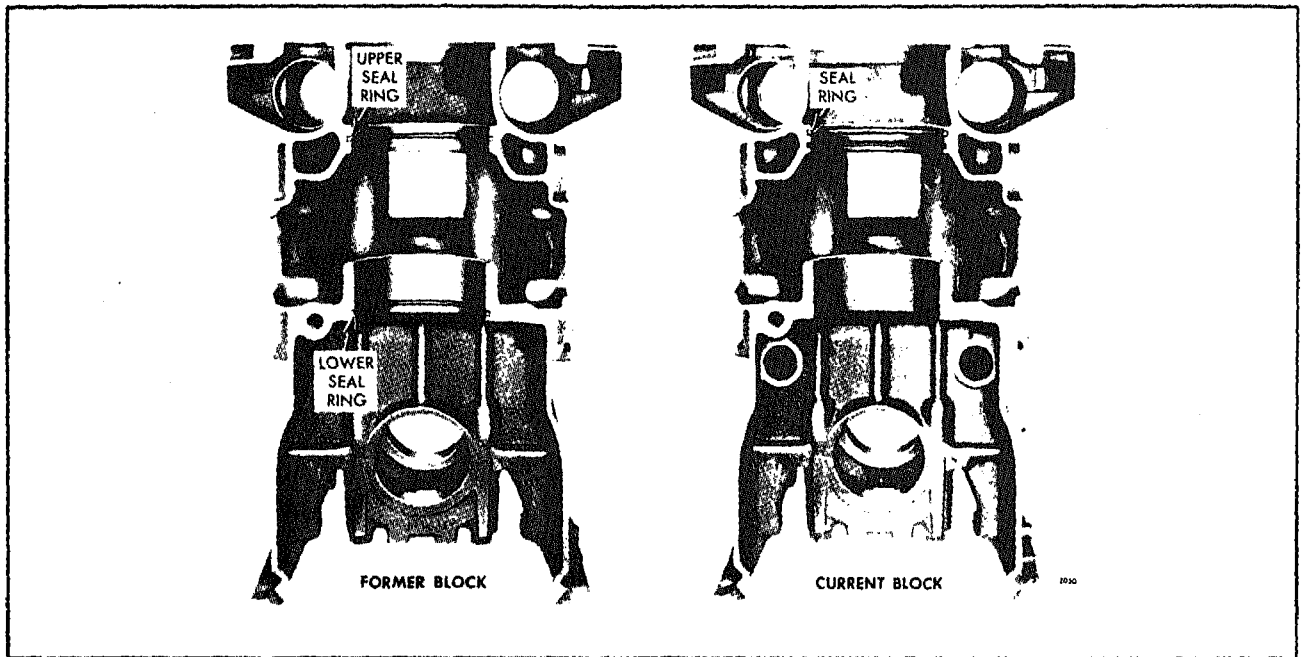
Cylinder Liner Seal Ring Location in Cylinder Block Bore
